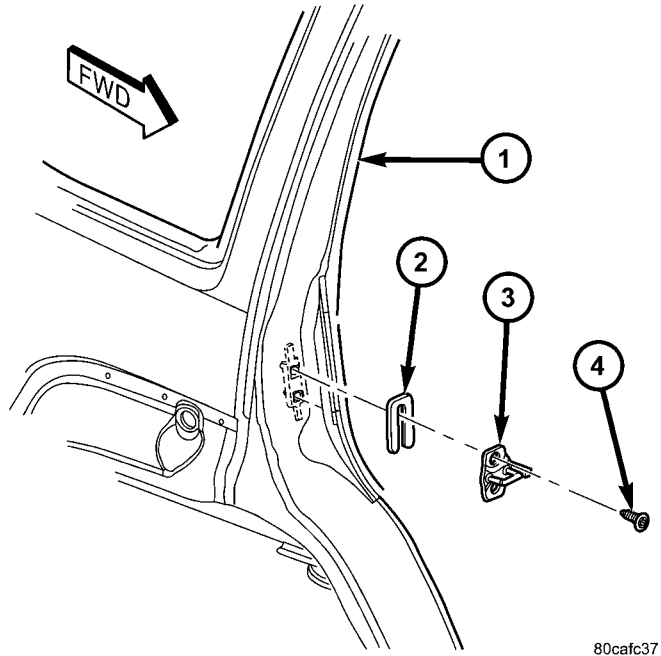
LATCH ADJUSTMENT SCREW - TYPICAL
